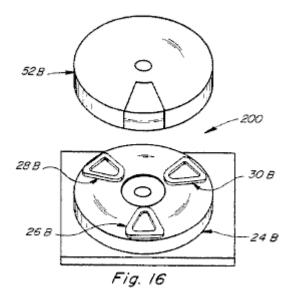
is a simplified embodiment of the device showing use of one movable magnet and three coils arranged to be in a plane between the rotating and stationary magnets.
